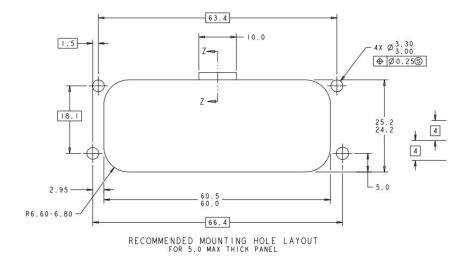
Hole Layout For Enclosure Where All The Wires From the J1 Connector Will Go
